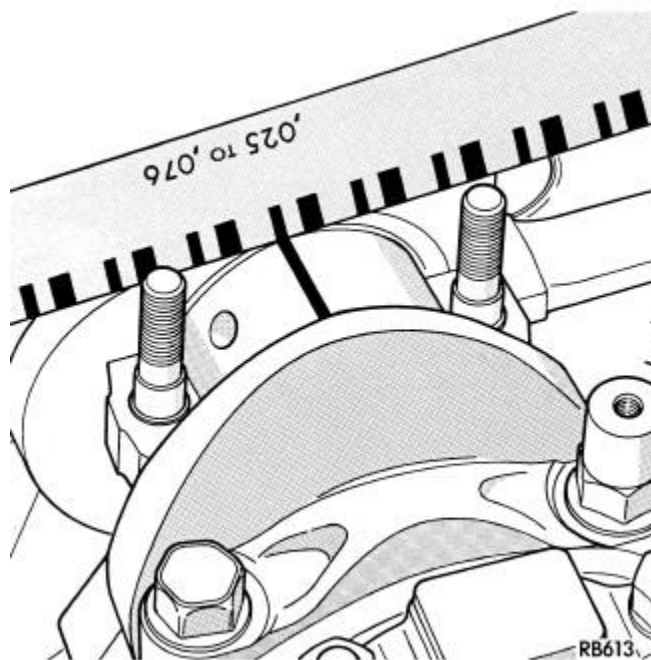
Checking Connecting Rod Bearing Clearance-Typical
